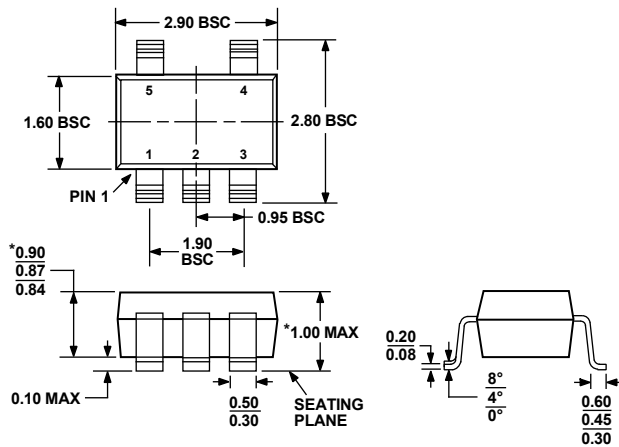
5-Lead Thin Small Outline Transistor Package [TSOT] (UJ-5)
